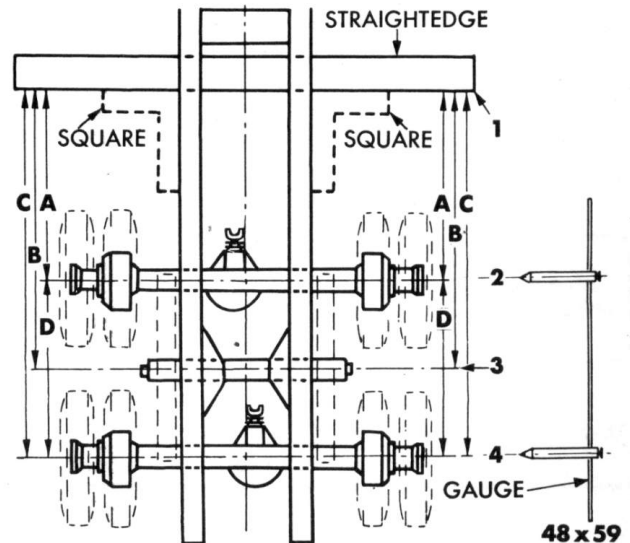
Method for Checking Tandem Alignment (Typical View)
